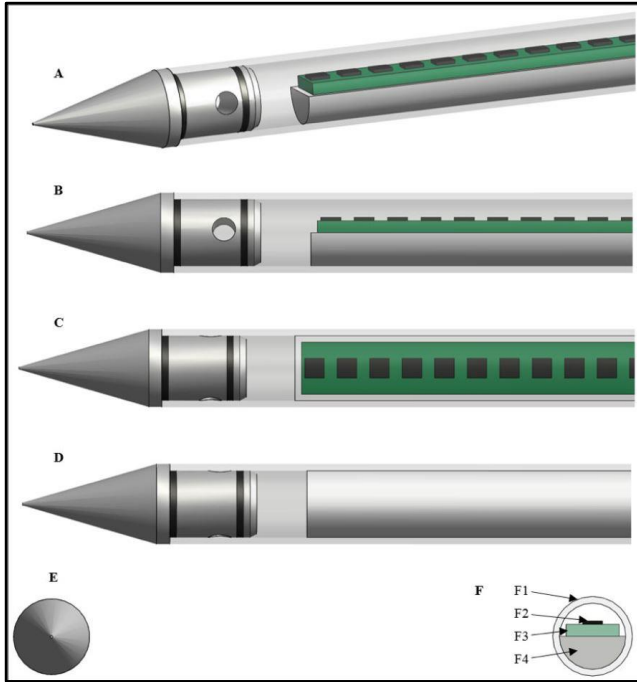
The realistically modelled virtual MAT device prototype. A – F indicate oblique, lateral, superior, inferior, introducer-end and cross-sectional views, respectively. F1 – F4 indicate the clear Perspex tube, sensor chip, printed circuit board and the semi-circular stainless-steel rod, respectively.
